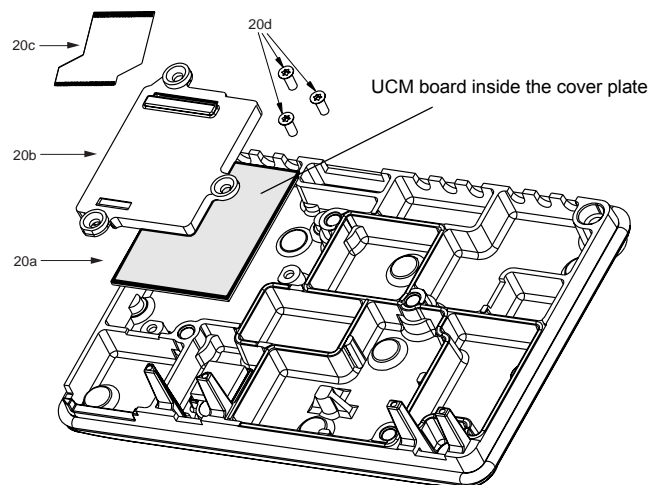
Location of additional UCM Board inside the Cover Plate
